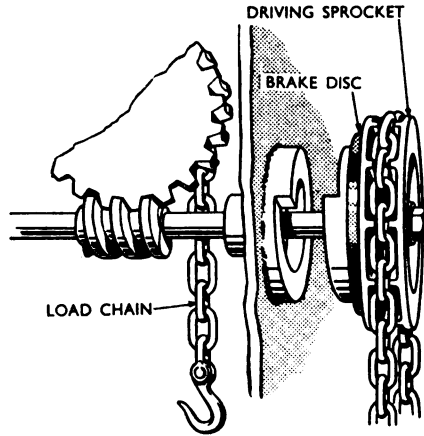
Alternative self-holding gear for worm and wormwheel block
